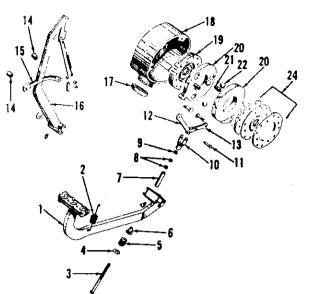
Left brake of B-275 tractor showing brake rod and points of adjustment. Step plate has been removed for illustrative purposes. Early Series B-414 tractors are similar. Refer to Fig. 125 for legend.
